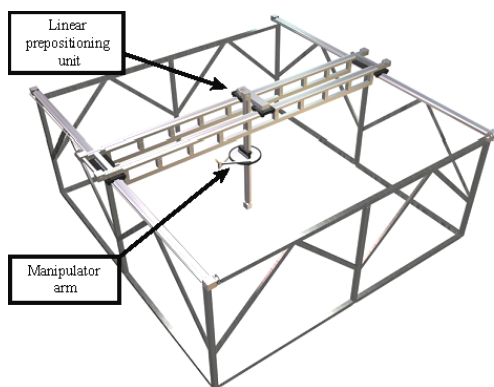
CAD drawing of the complete setup with linear repositioning unit and manipulator arm.
